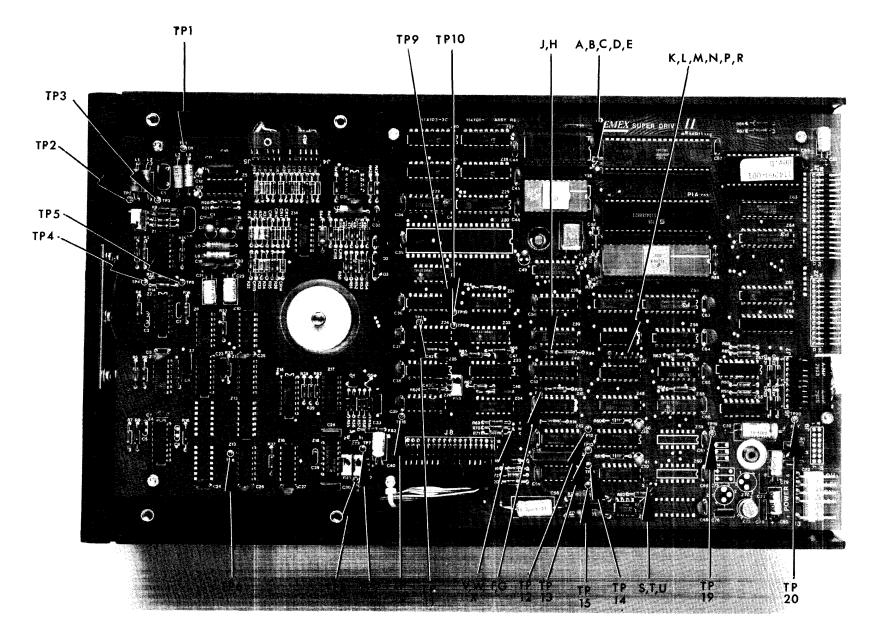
View of Master P.C. Card (RFS4810/2410).
